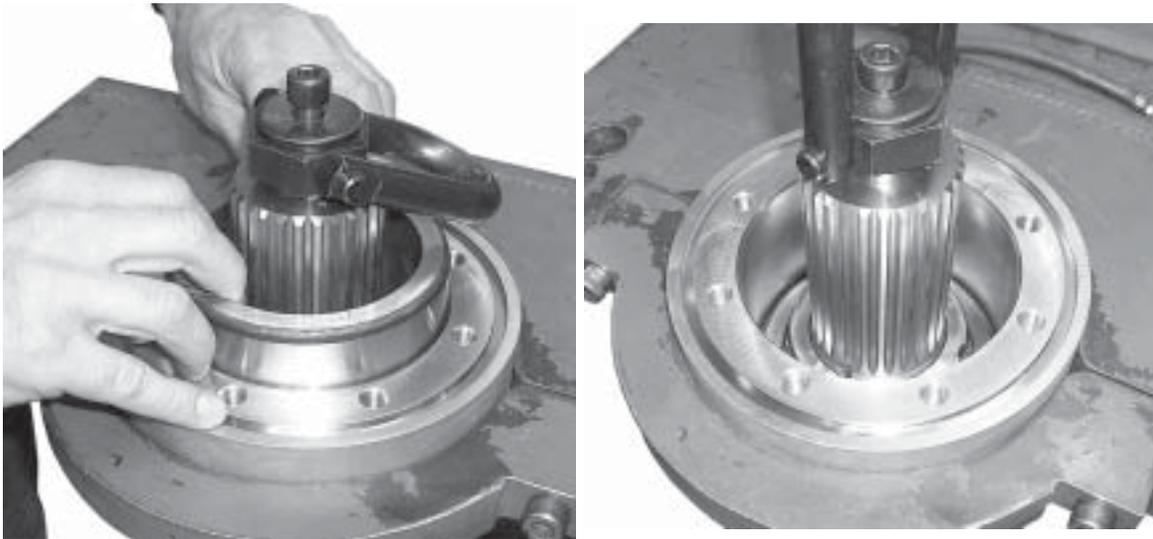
Install the Chilled Front Bearing Cup (left), and Raise the Shaft to Ensure End Play (right)
